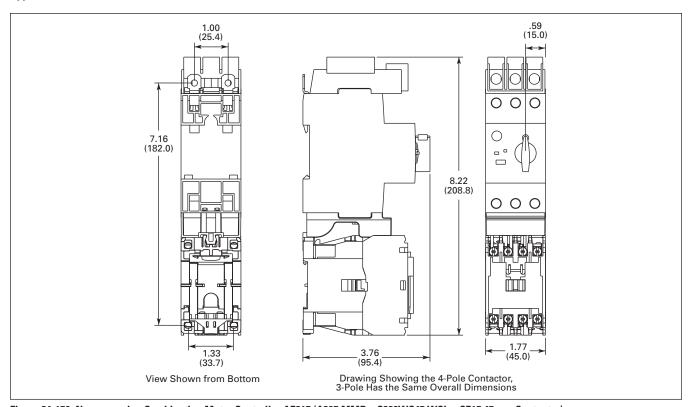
Non-reversing Combination Motor Controller AE317 (A307 MMP + C320WC45 WCL + CE15 45 mm Contactor) — Approximate Dimensions in Inches (mm)
